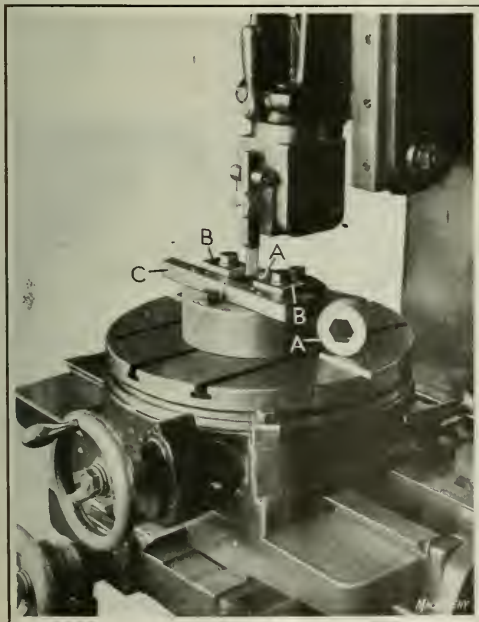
Vertical Shaper equipped with a Fixture for Use in shaping a Hexagonal Hole
